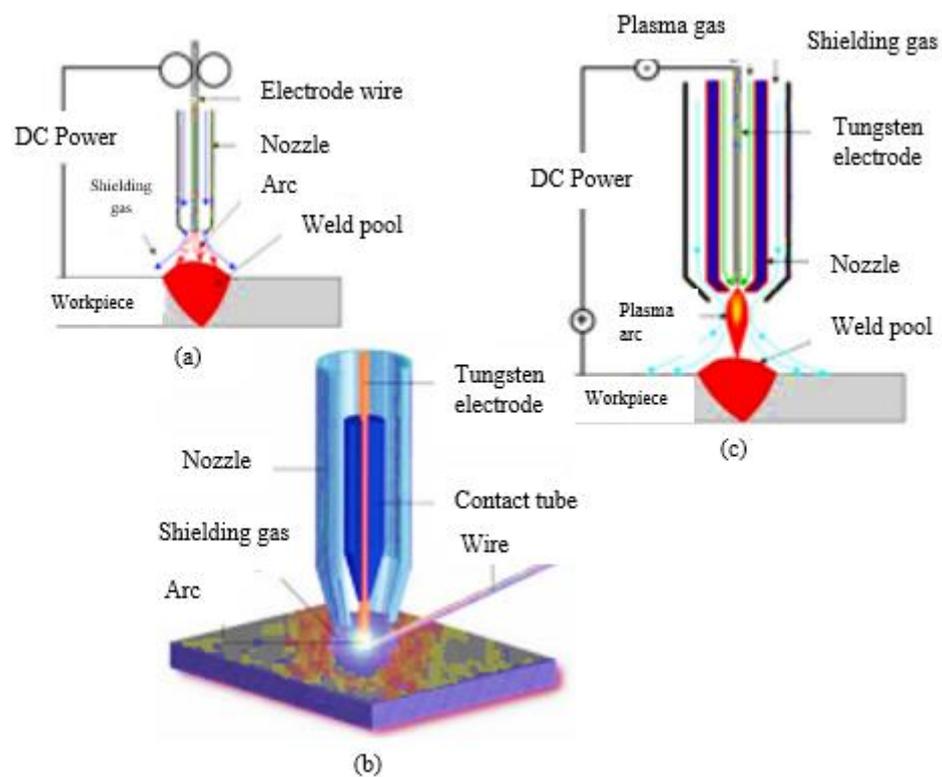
Wire Arc Additive Manufacturing. Principle of WAAM with: (a) MIG; (b) TIG; (c) Plasma Arc Welding.
